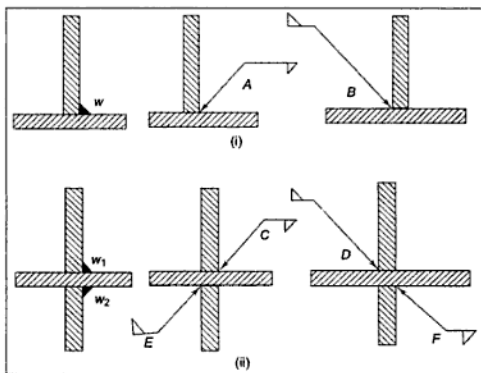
Placing of Symbol for Weld on Particular Side
